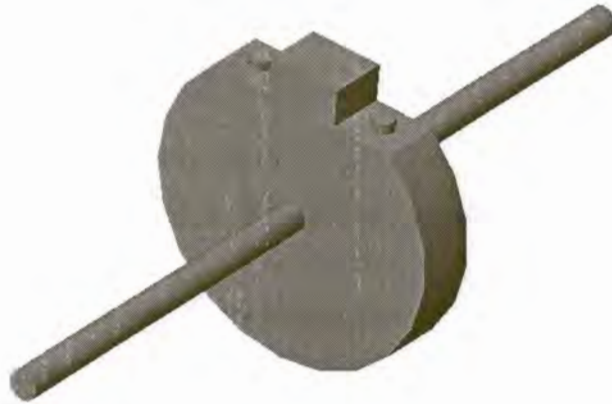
Device used to repair “air mattresses” with discontinuities in the weld lines.
